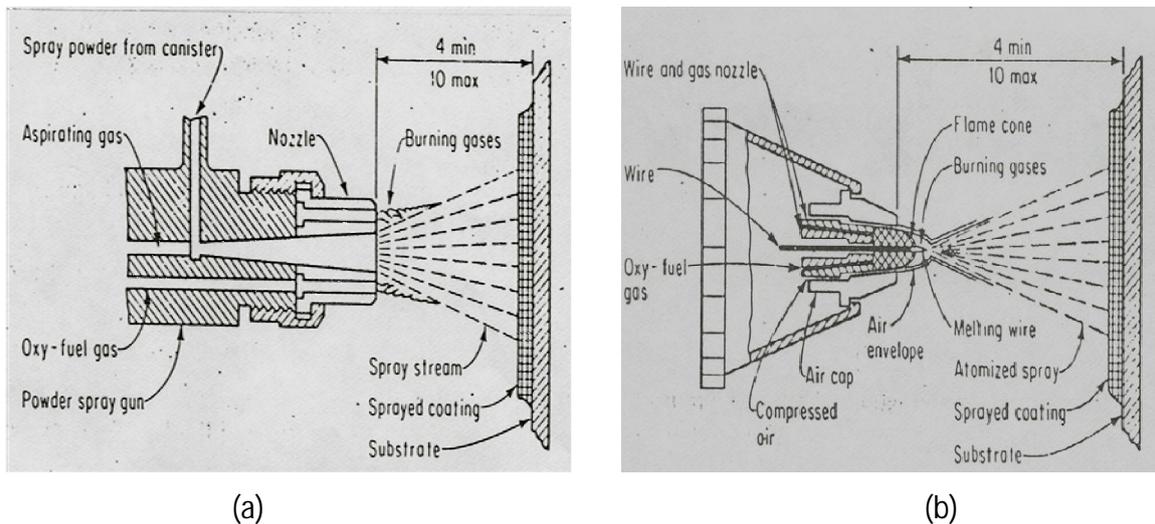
HVOF COATING TECHNIQUES USING SPRAY MATERIAL IN THE FORM OF
